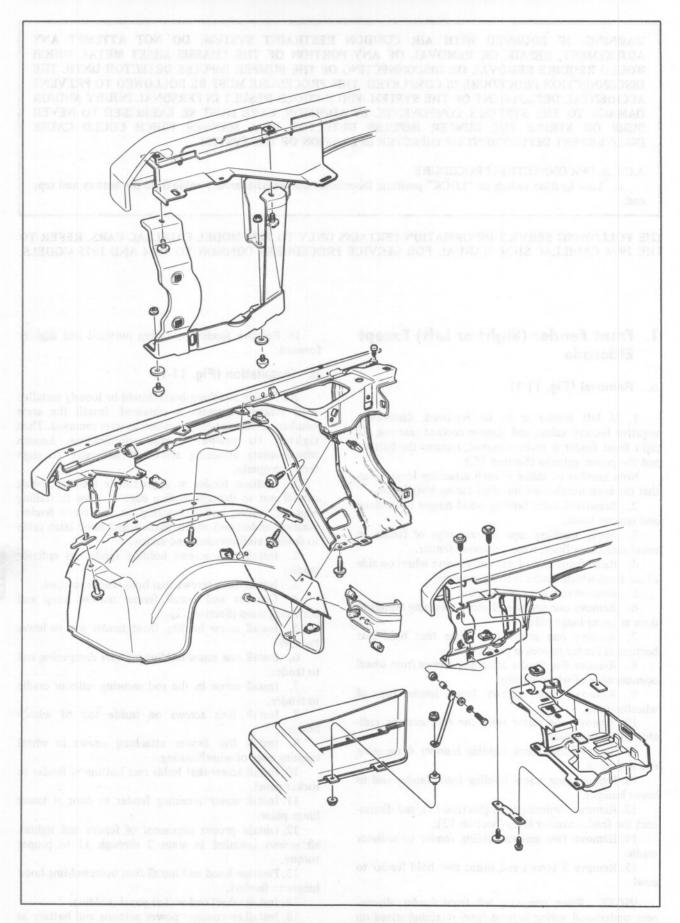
Front Fender Disassembled (Except Eldorado)
